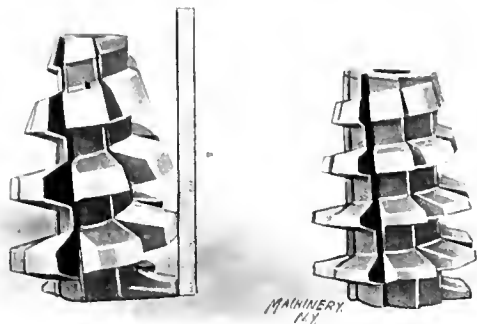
Style of Hob used for Machine shown in Fig. 126
